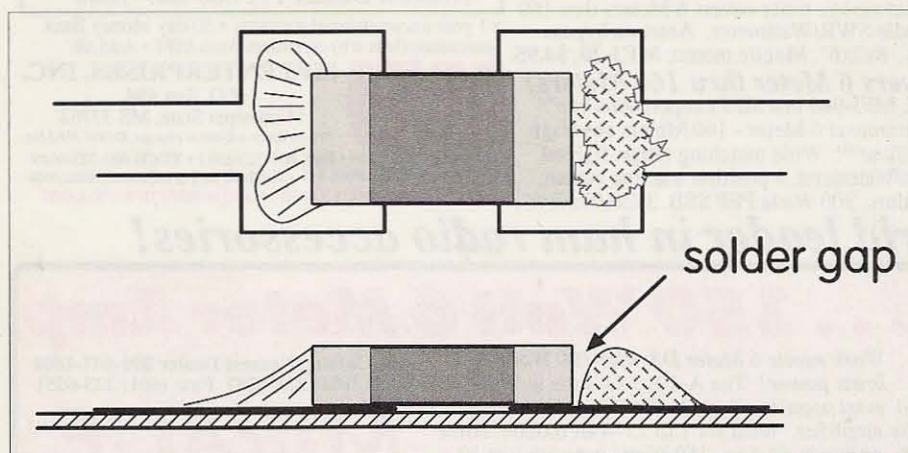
Absence of a solder joint. There is no solder wetting of the SMD. The lack of wetting may also occur at the pad to create an open or intermittent connection.
